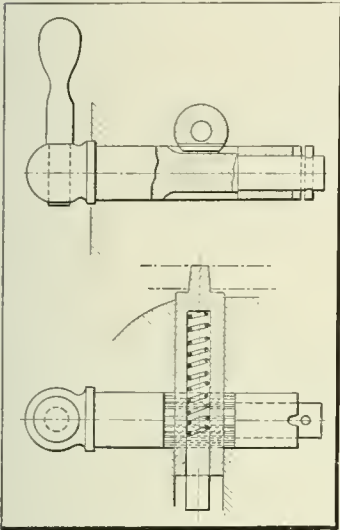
Withdrawing and Locking Device for Spring Plunger
